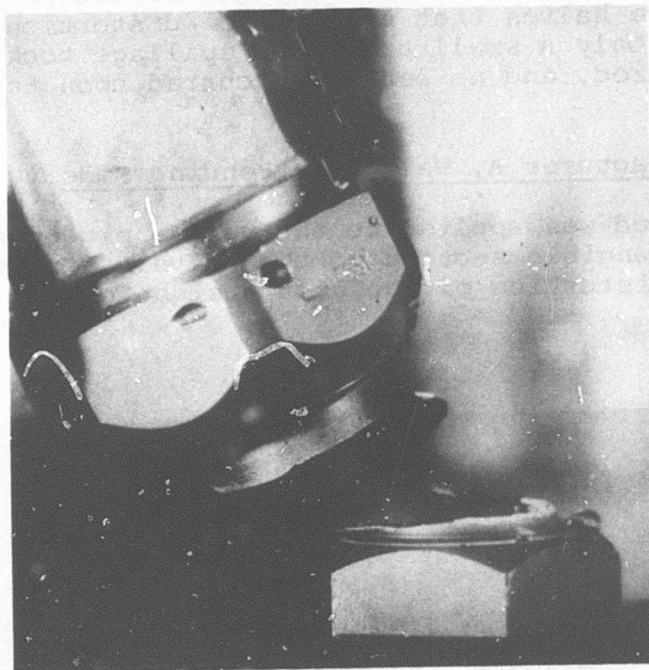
Bending Test, Valve 1, Following Boot Rupture.
